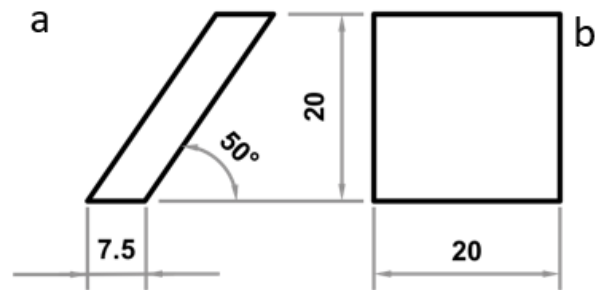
Sample block dimensions (mm). (a) Side (b) Front
